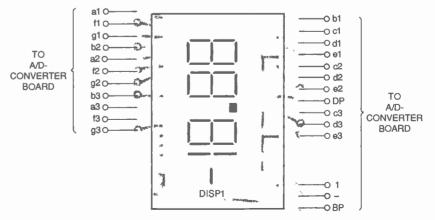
The only component that mounts on this board is DISP1. However, watch those connections to the A/D converter board!
